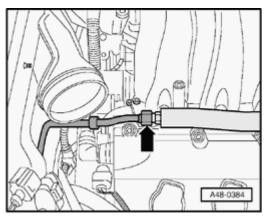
Disconnecting Extension Hose While Counterholding Extension Hose Hex Head Courtesy of VOLKSWAGEN UNITED STATES, INC.
